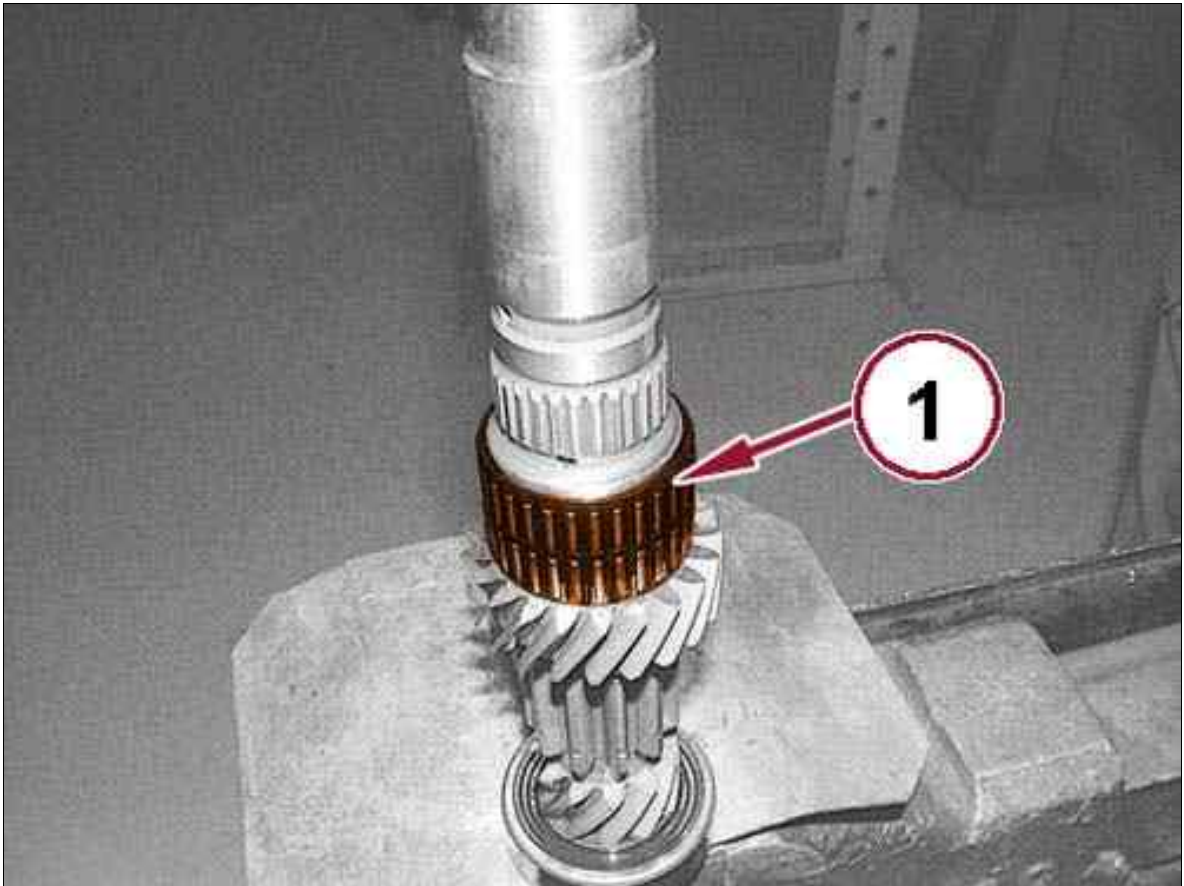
4th Gear Drive Gear Bushing, 3rd And 4th Gear Synchronizer Hub, 3rd Gear Synchronizer Ring & 3rd Speed Drive Gear
